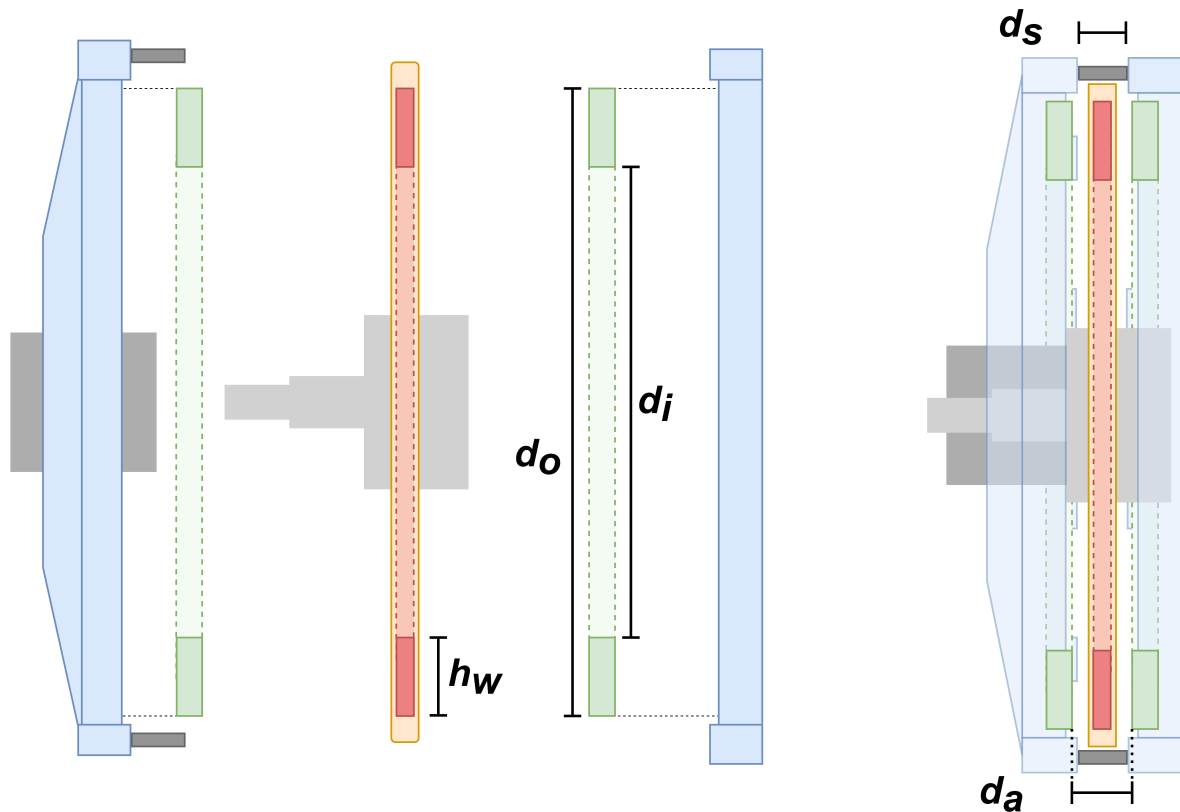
Schematic overview of the different relevant components of the motor, on the left side they are "exploded" while the right shows the assembled motor. Blue : two rotor halves. Green : magnet ring. Orange : stator. Red : windings. Dark grey : partial thread bolts with shims. Grey : rotor part to fit shaft. Light grey : motor shaft.
